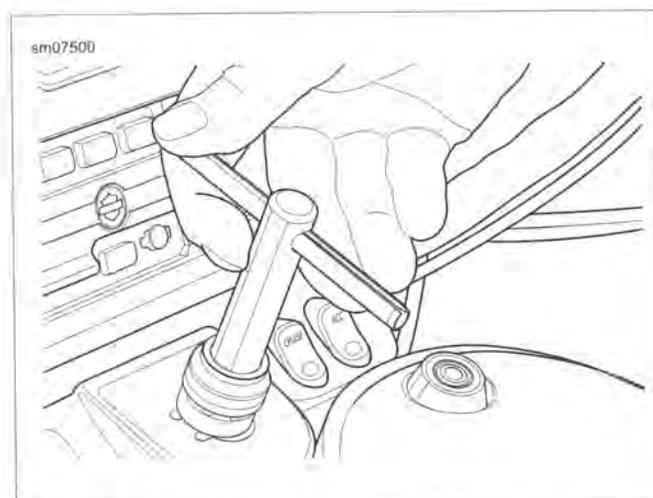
Bottom Alignment Tool in Threaded Post and Rotate to Desired Position
